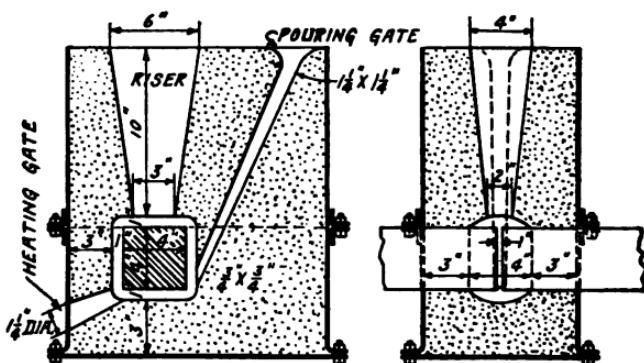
Section of Typical Thermit Mold Showing Riser, Pouring Gate, and Heating Gate
